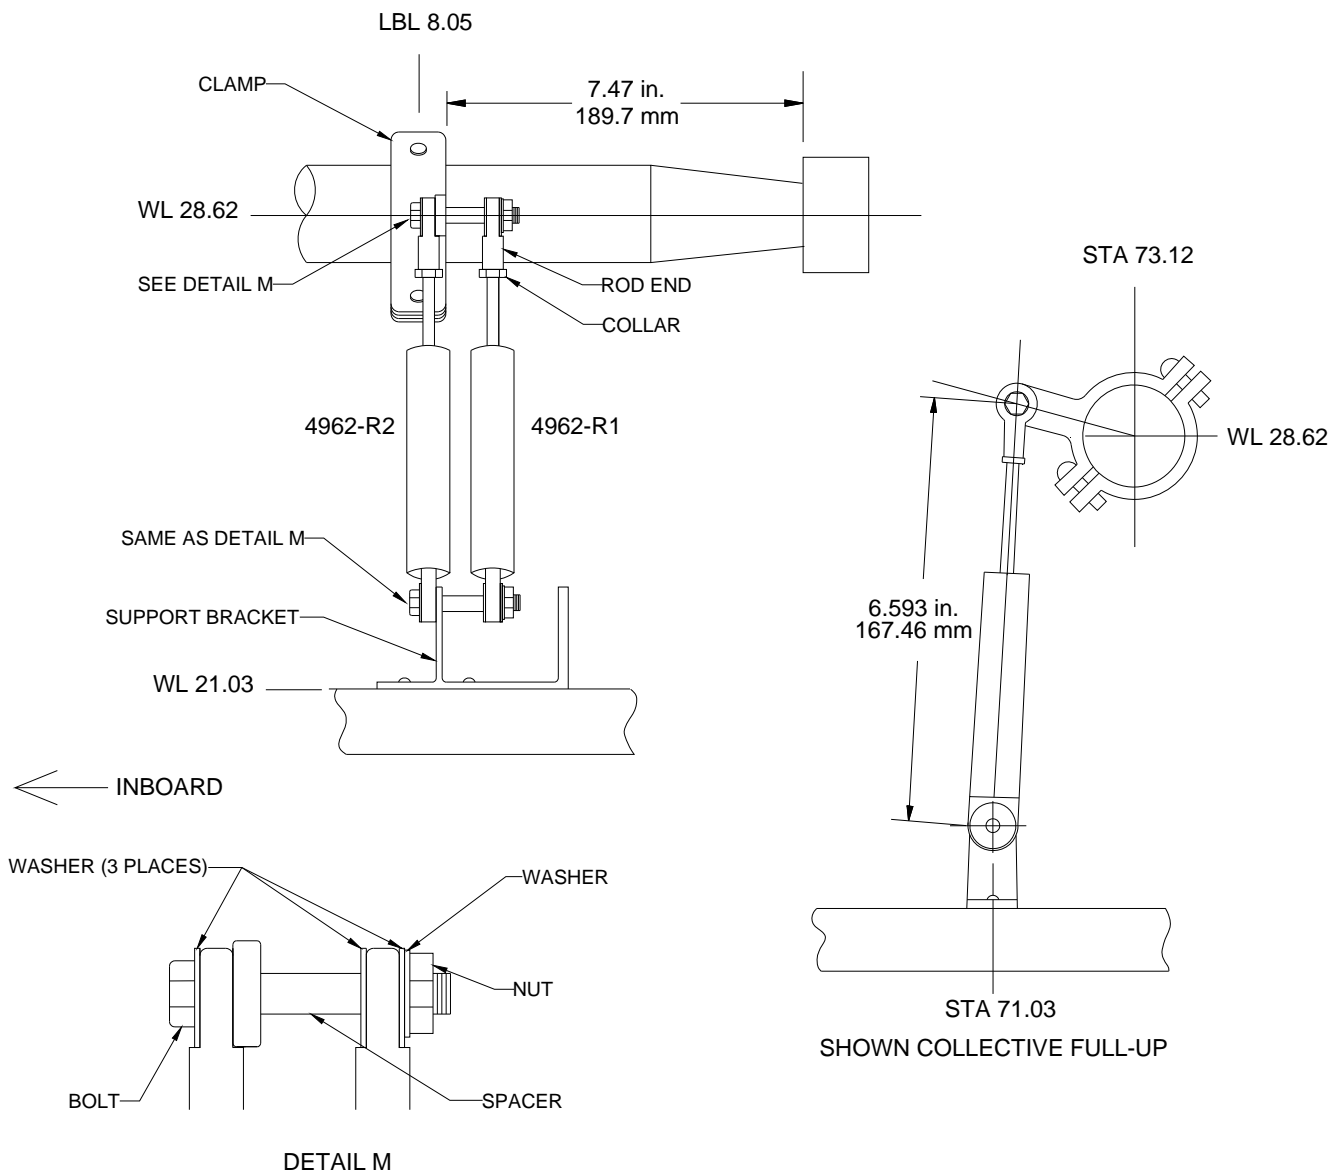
Collective Pitch Transducer Installation and Rigging
